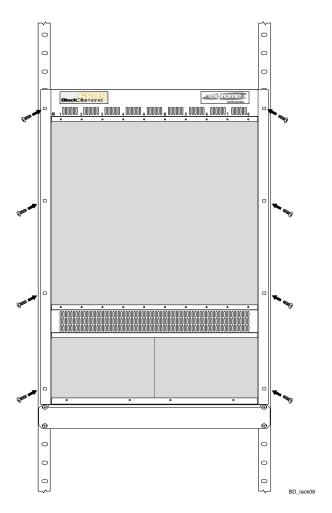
The BlackDiamond 6808 chassis requires 8 screws to be securely mounted in a rack
